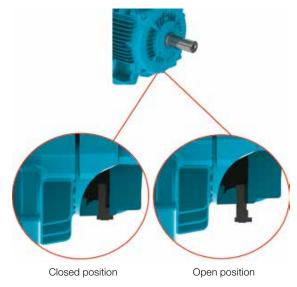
Detail of the rubber drain plug mounted in closed and open position
